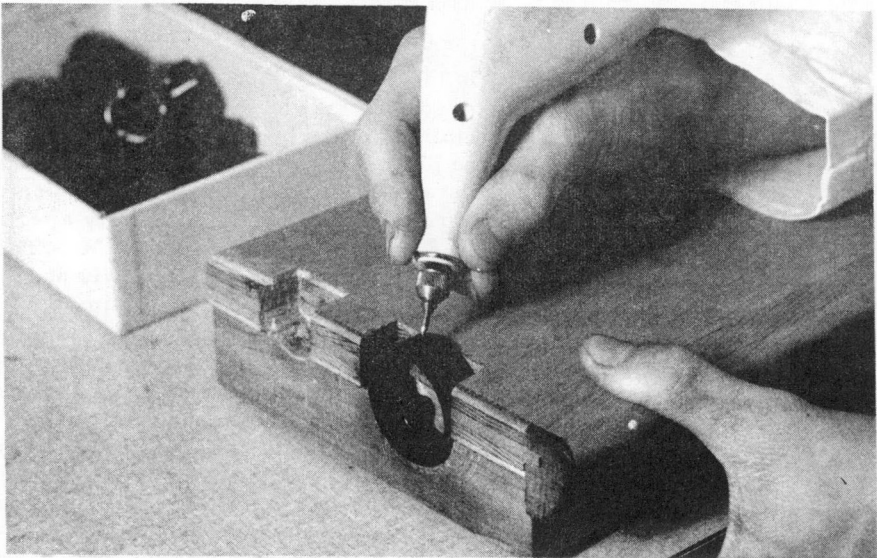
Jig for holding bakelite rings while scribing identification with vibrating engraver. (GSC 200347-F)
